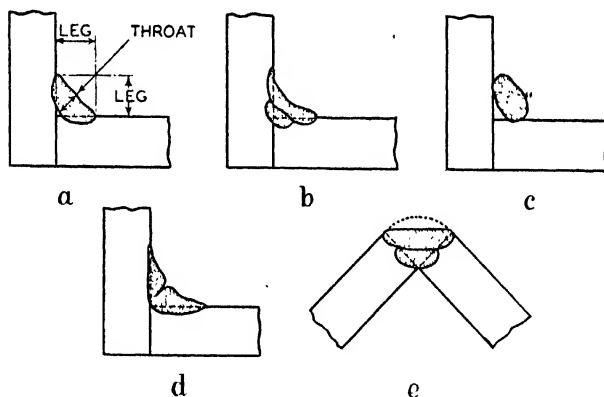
POSSIBLE DEFECTS IN FILLET WELDS
